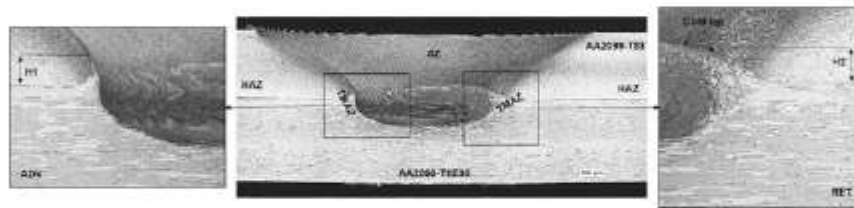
Cross-section of FSW lap joint produced at 800 rpm and 250 mm/min by a tool with three flats
